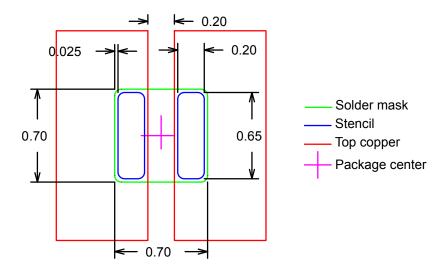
Recommended PCB solder pad layout for L0F2-Bxxx5000xxx1.
